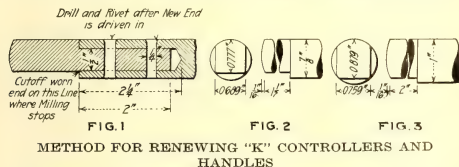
Method of renewing handle fit on controller shaft. Fig. 2—Handle end of shaft for K-10, K-11, K-12, K-27 and K-63 controllers. Fig. 3—Handle end of shaft for K-6, K-28, K-29, K-36, K-36, K-40, K-51 and K-66 controllers.
